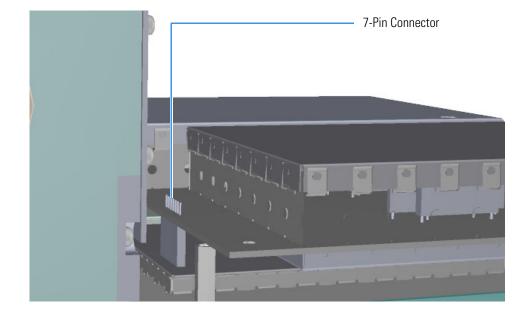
Disconnecting the Rod Driver Board 7-Pin Connector
